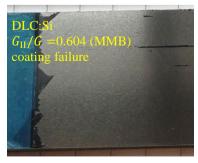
Fracture surfaces of DLC:Si coated specimens (representative examples).
